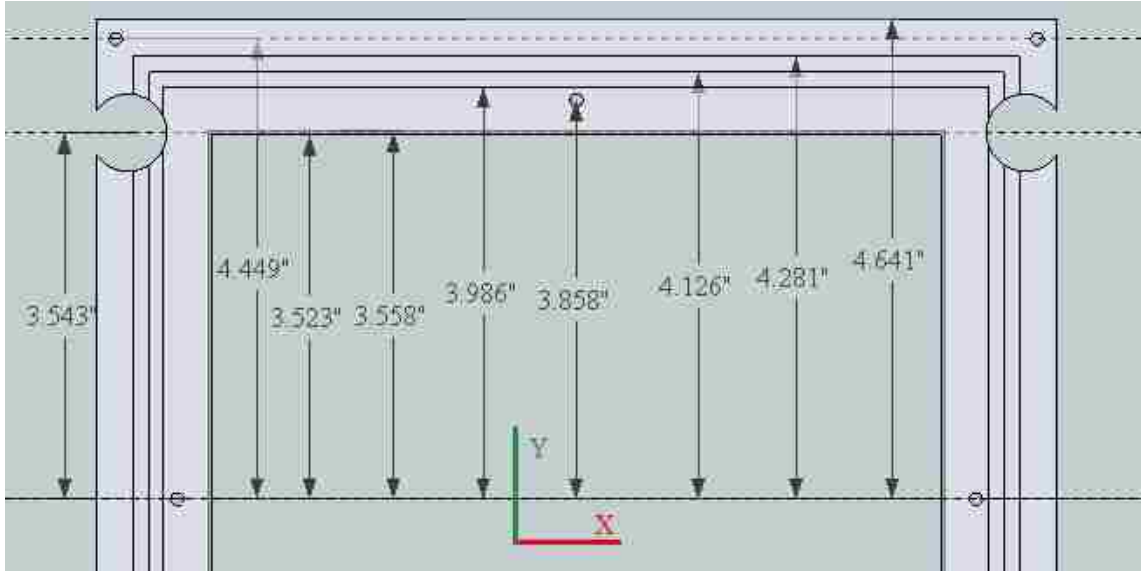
Top view of the 20x20 cm² middle trimmer lead plate illustrating the in-plane dimension. The middle trimmer is square, such that all non-hole dimensions are equal in the in-plane and cross-plane dimensions.
